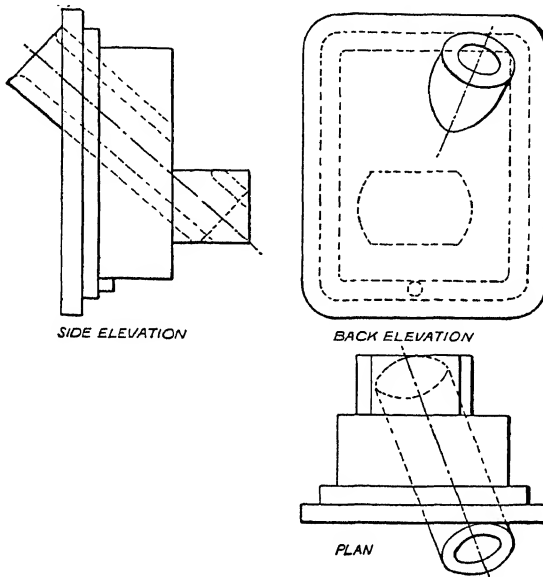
Drilling Bush set at Angles in a Locating Block
